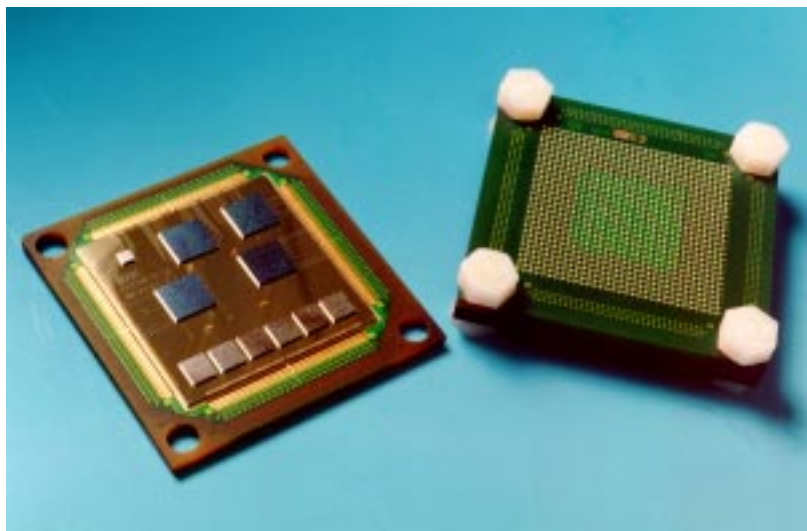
A prototype FERMI MCM in a BGA package.
